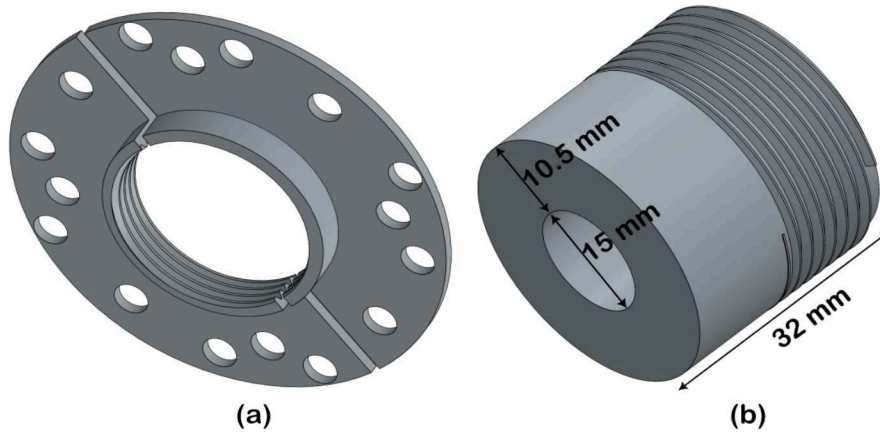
50 K shield aperture components. (a) The half moon plates made of aluminum which are attached to the 50 K shield of the HD-EBIT. (b) The aluminum hollow cylinder that is screwed to the half moon plates. Together these form the aperture in the 50 K shield.
